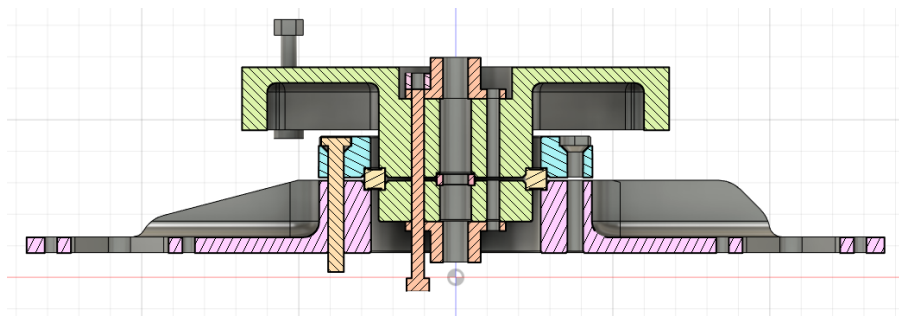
Cross-sectional View of Horizontal Rotation Mechanism
